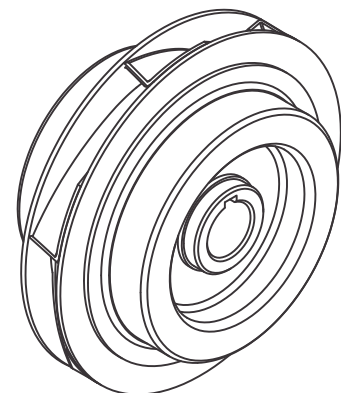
Fabricated Impeller, SNB and SNK pumps
